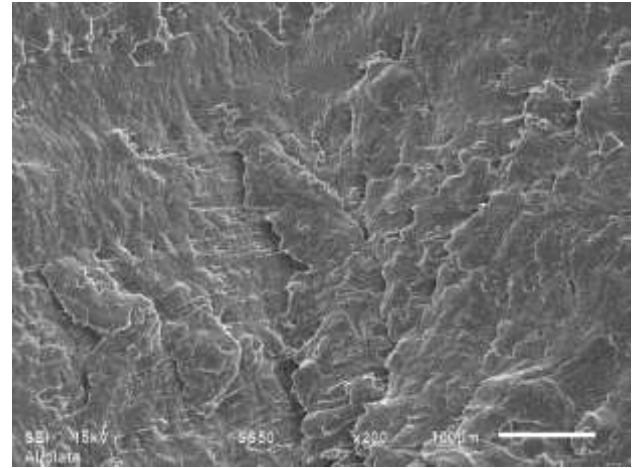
The SEM image shows the fracture Surface of the plate with conventional rolling sample after Charpy testing
